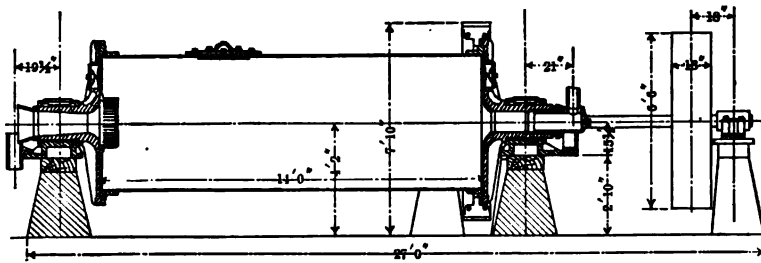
TUBE MILL. SECTIONAL ELEVATION.
